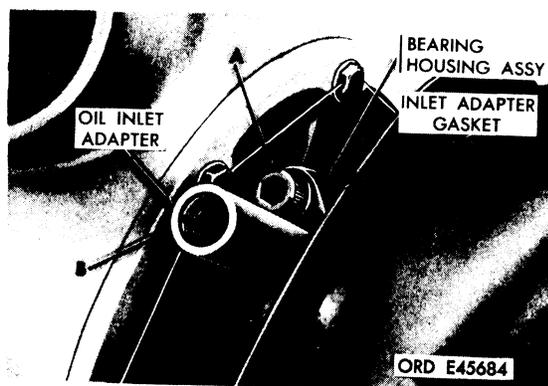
REMOVING OR INSTALLING OIL INLET ADAPTER - TURBOCHARGER 7748900
